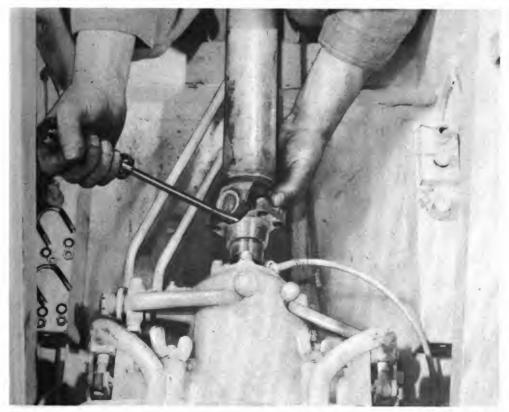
Disconnecting Propeller Shaft at Axle Unit Driving Flange
